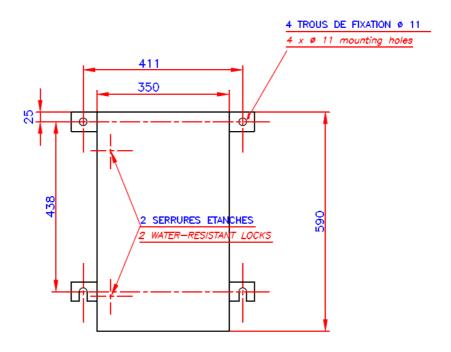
OUTLINE AND MOUNTING DIMENSIONS OBSTAFLASH HI POWER SUPPLY.
